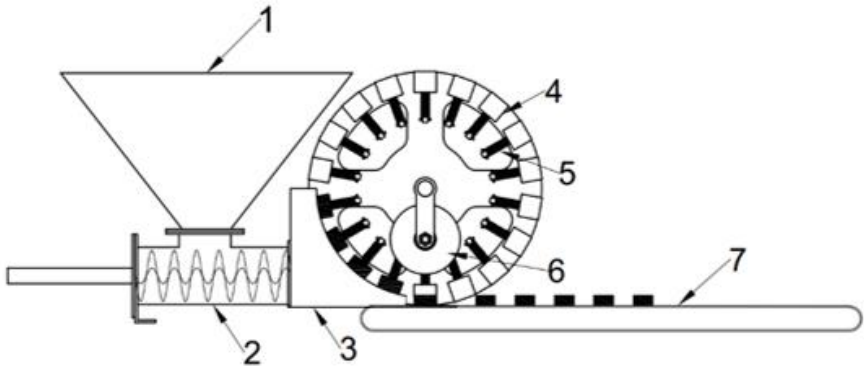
Charcoal briquette pressing mechanism. Component numbers: ① Hopper; ② Screw Conveyor; ③ Feeder; ④ Dies; ⑤ Pressing Rod; ⑥ Press Cam; and ⑦ Conveyor
